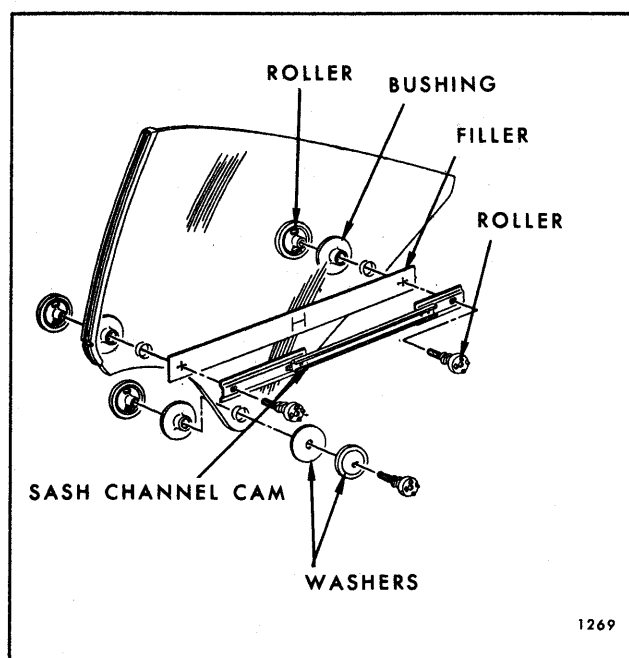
Rear Quarter Window Assembly - "Z-37" Styles
